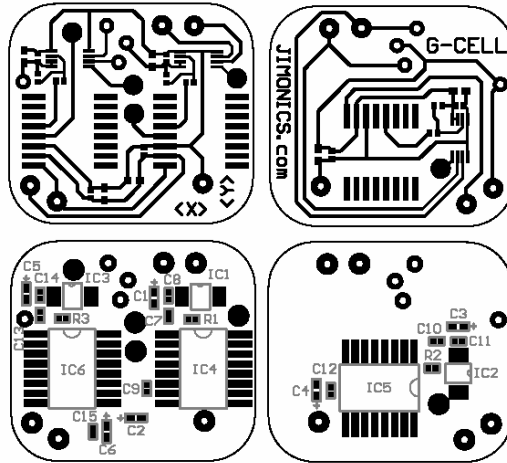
MEMs 3D Accelerometer PCB Layout (Not Actual Size)
